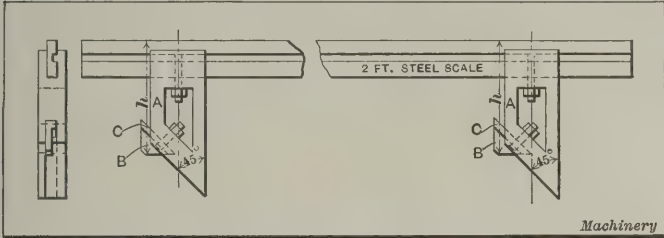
Special Gage used for Testing Planer Beds and Tables
